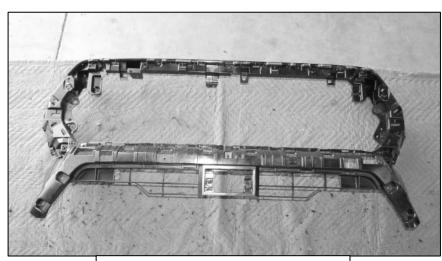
Trim lower section of inner plastic bumper under white guide lines. Bumper disassembled for illustrative purposes only
